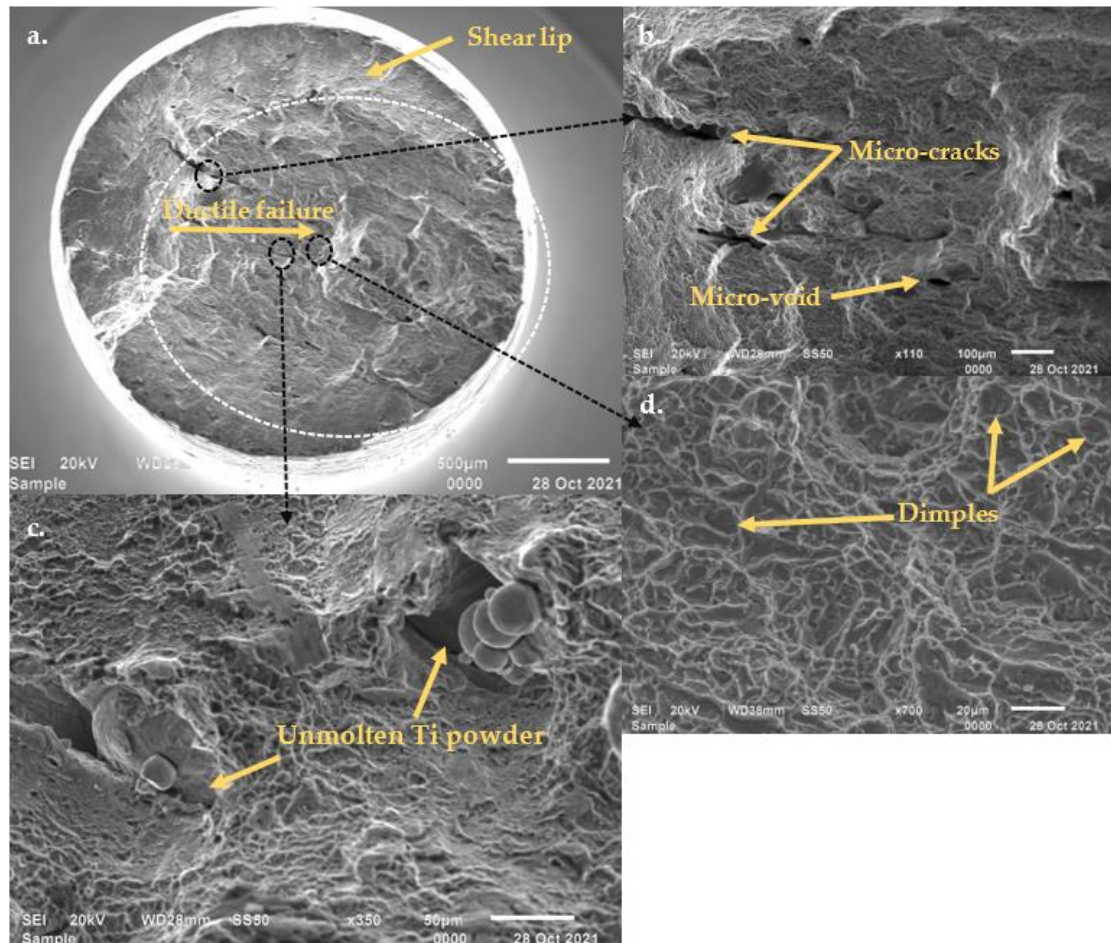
SEM SEI micrographs of the fracture surface of a tensile test specimen produced by PPS 1: (a) the overall fracture surface showing the shear lip and ductile failure in the central part of the fracture surface (crack initiation), (b) micro-cracks and voids, (c) unmolten Ti powder particles, (d) ductile region with dimples
